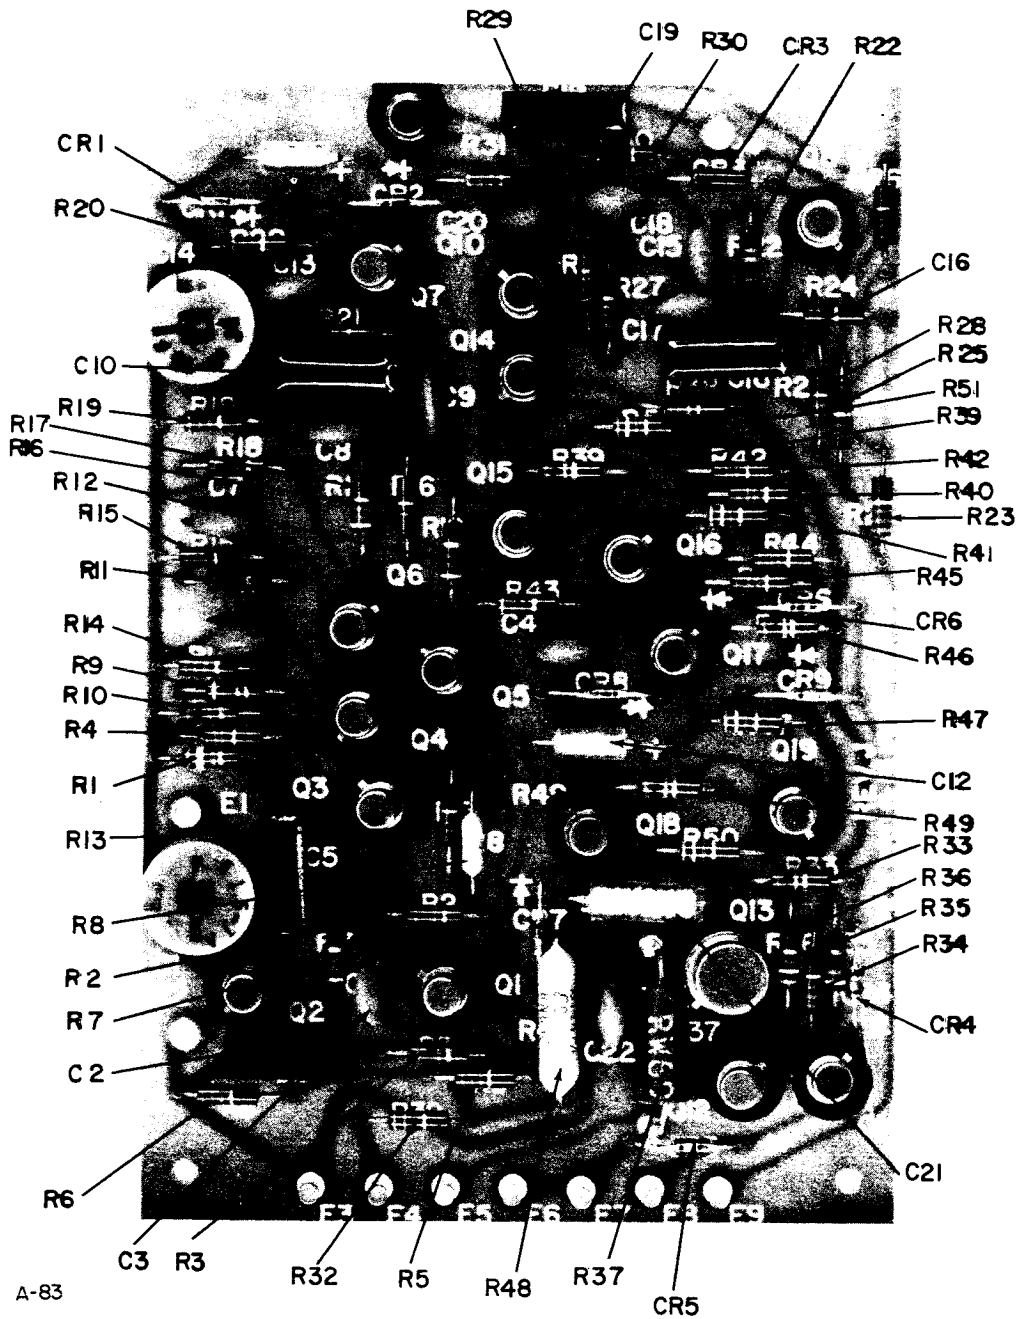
PC-172 CIRCUIT BOARD PARTS LOCATION
